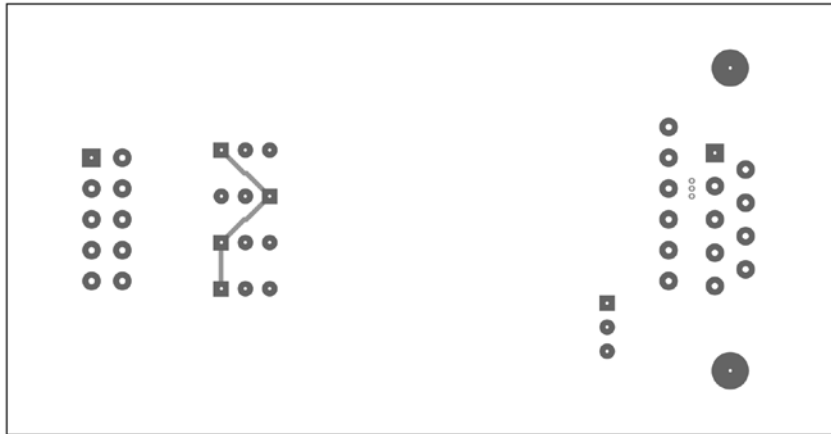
Low EMI Demo Board Layout (DC1746A), Inner Layer 2
